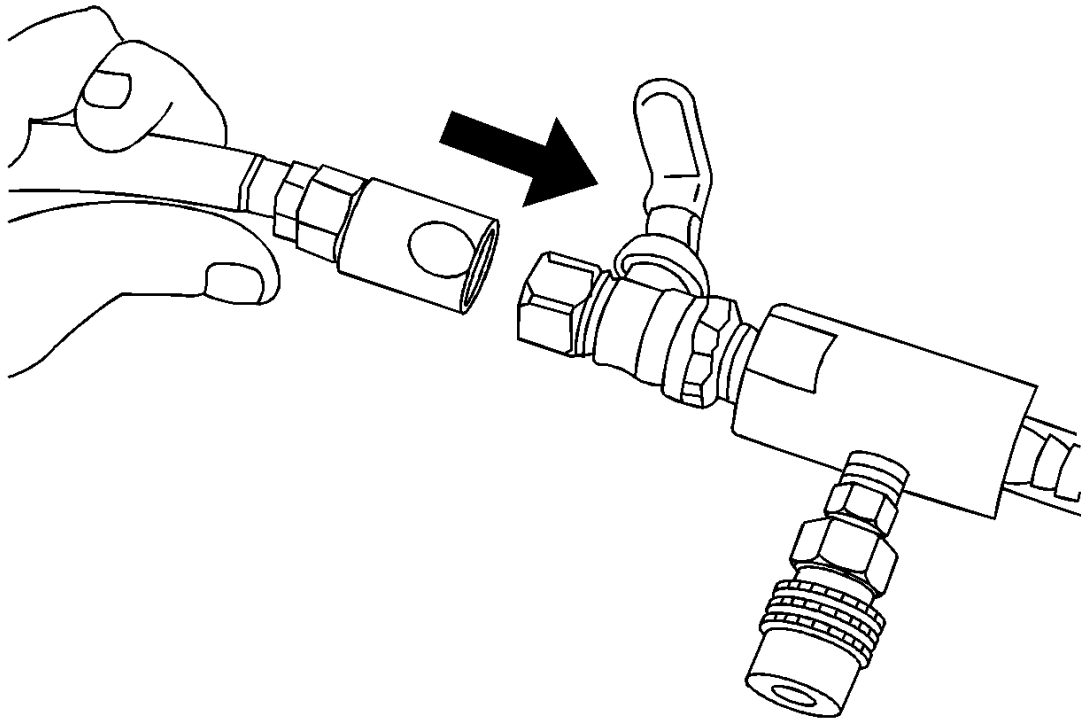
View Of Shop Air Hose & Venturi Assembly
